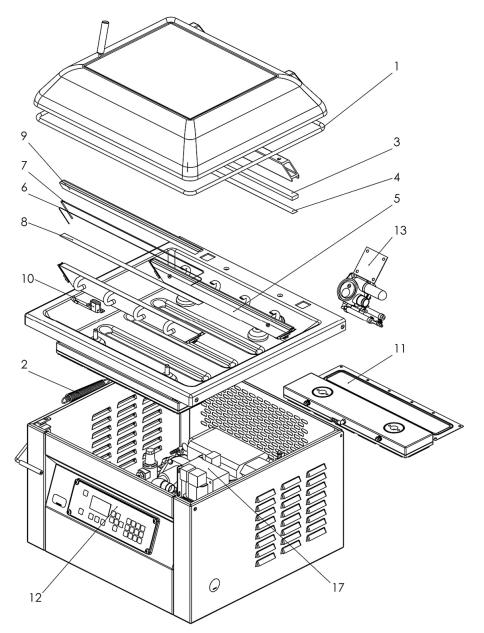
Spare parts drawing (SAP-DIS 16000134755)
